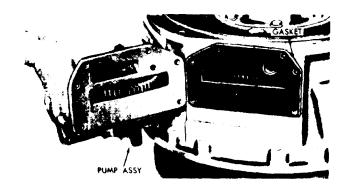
C-11. Removing (or Installing) Charging Oil Pump
